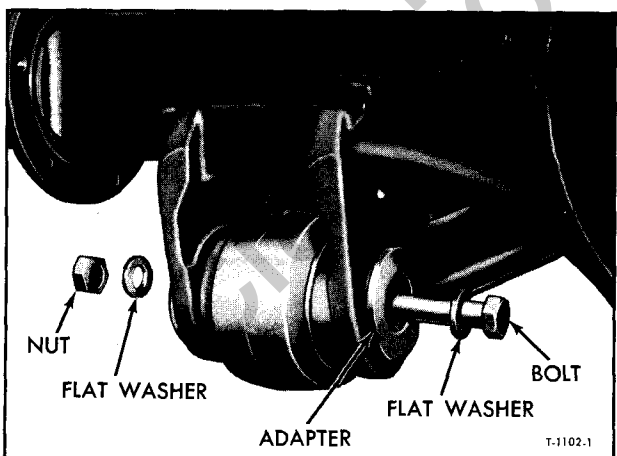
Adapter and Retaining Bolt at Axle Bracket
